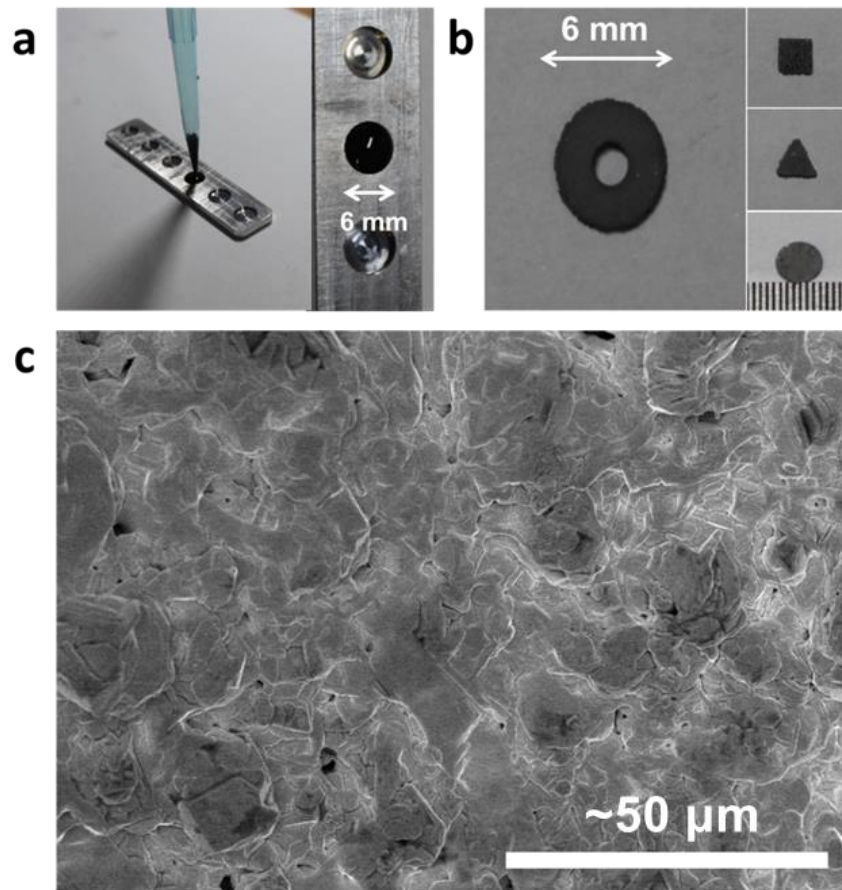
Moulding process of TE paints. (a) A photograph showing TE molding process. (b) A photograph showing molded 3D blocks with diverse shape such as ring, cube, triangle, and disk. (c) SEM image of the molded sample.
